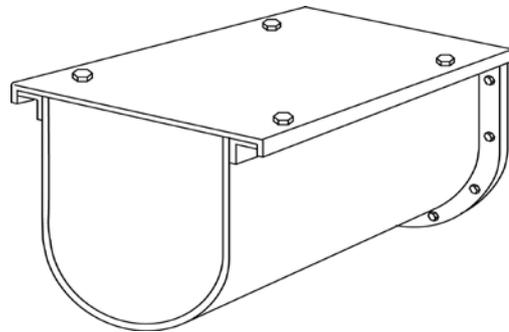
Angle Flanged Type Trough With Flanged and Bolted Cover [ANSI/CEMA 350-1971, 2009 (Figure 4.16A)]
